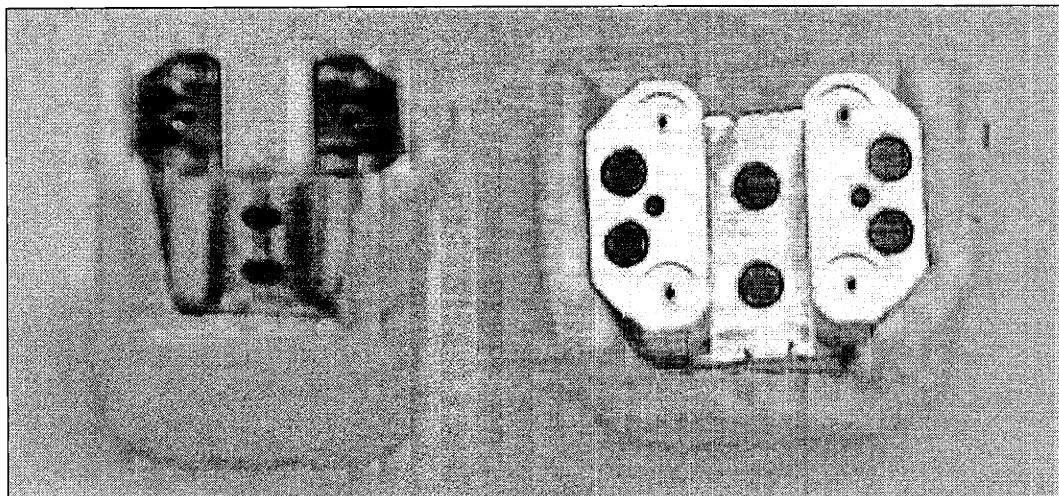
Insulated DieMate™ manifold: top isometric view (left) and top view (right).
